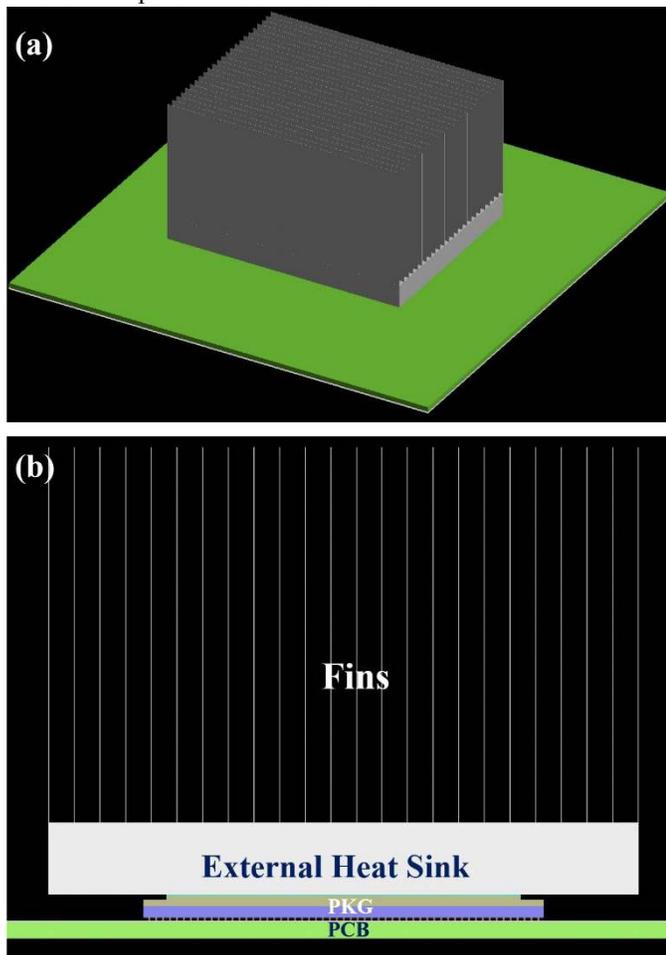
Top: Diagram of merged layout of PCB and PKG, 3D drawing; Bottom: Diagram of merged layout of PCB and PKG, with a side view of the package and PCB.
